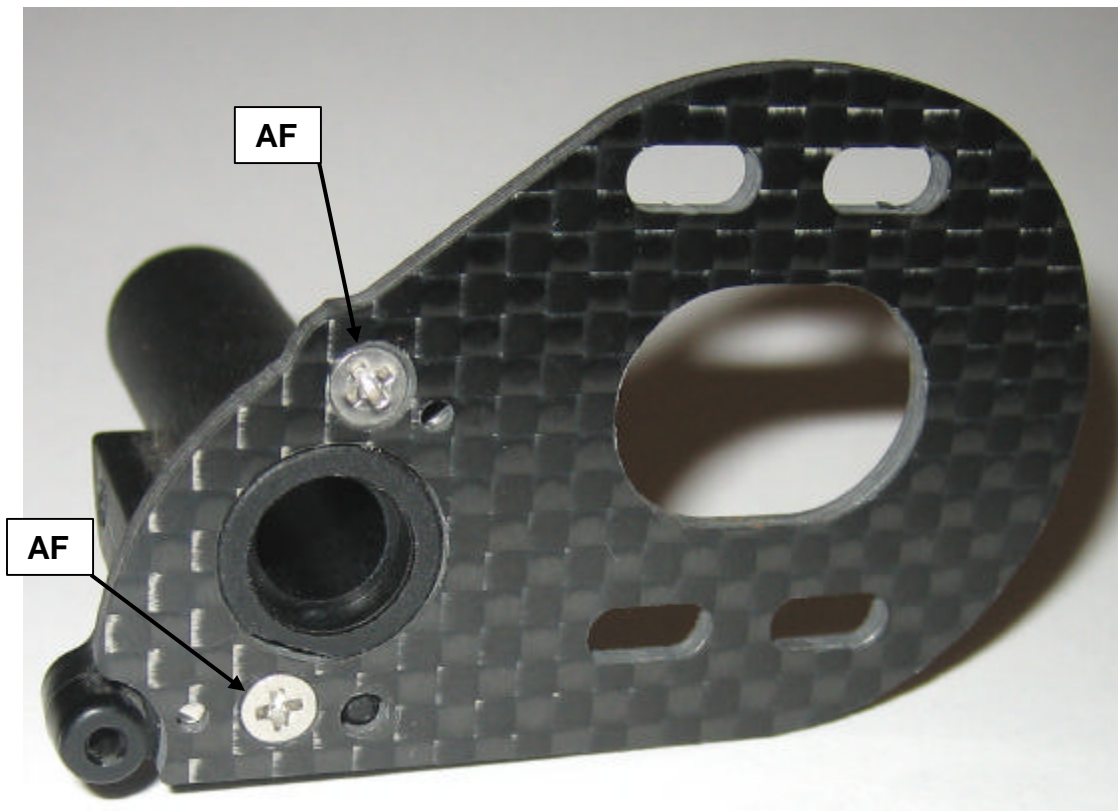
Screw the two 1/4" 2-56 Phillips Flush-Mount Motor Plate Screws [AF] into their respective holes in the rear bulkhead.
